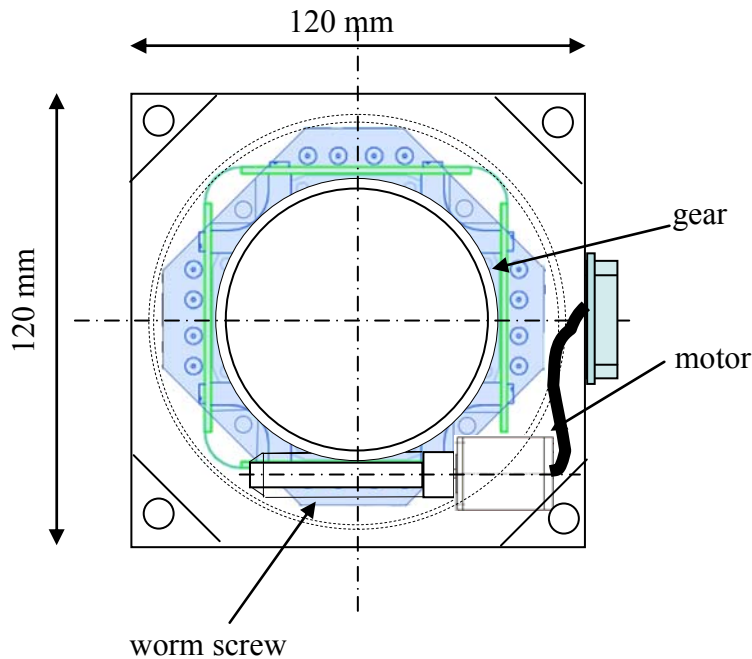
Rejection system box, with the gear, the worm screw and the stepper motor
